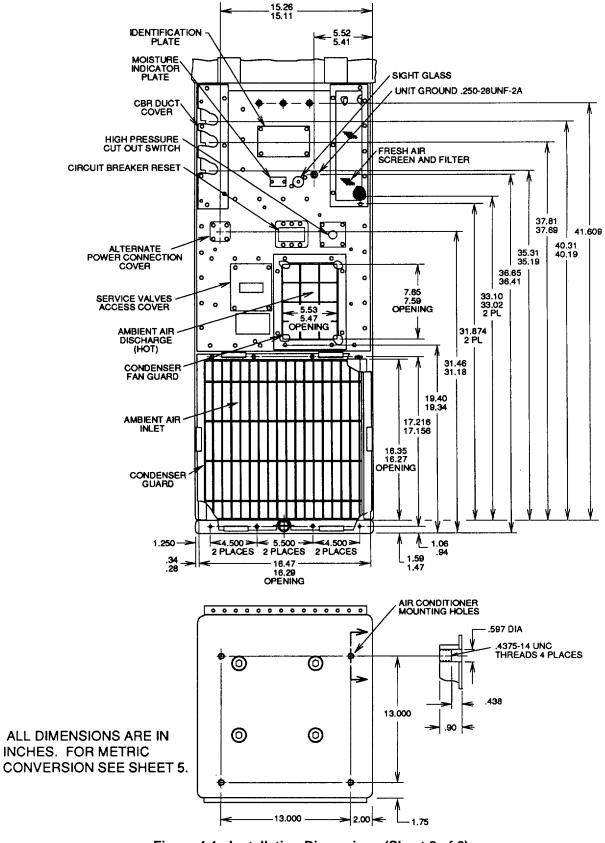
Installation Dimensions (Sheet 2 of 6)
